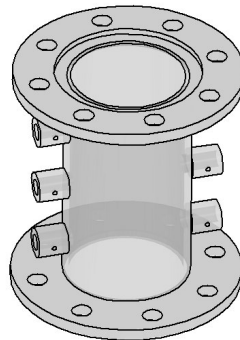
Technical Drawing of the Test Section as Isometric View
